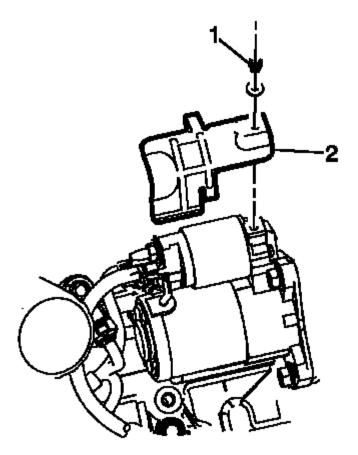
Starter Heat Shield Courtesy of GENERAL MOTORS COMPANY
